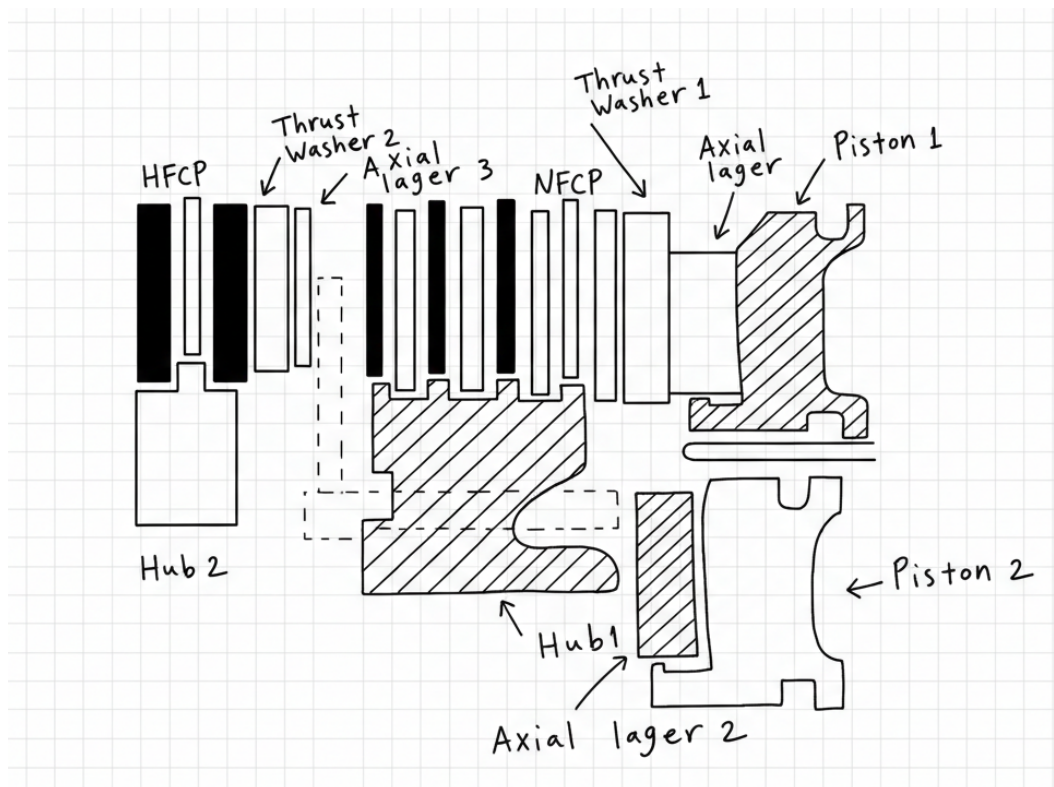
Image of a dual-piston hydraulic clutch actuator layout
